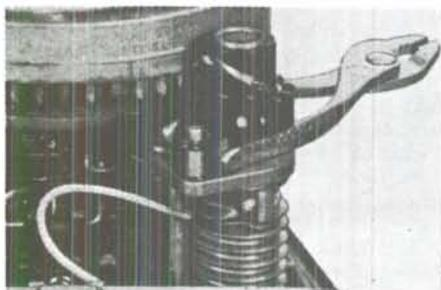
The starter pinion can be blocked up as shown for removing starter rope.
